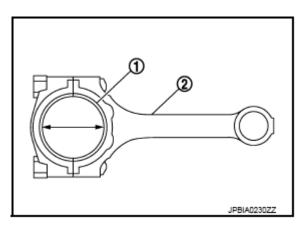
Identifying Connecting Rod Bearing Oil Clearance Courtesy of NISSAN NORTH AMERICA, INC.
